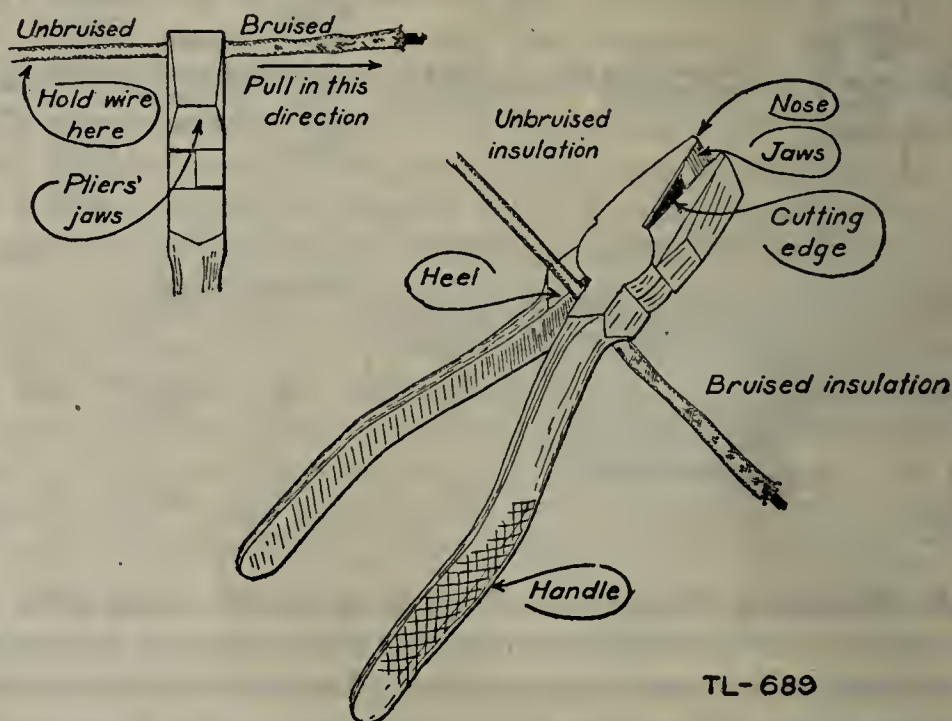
Method of using side-cutting pliers to remove insulation from wire
